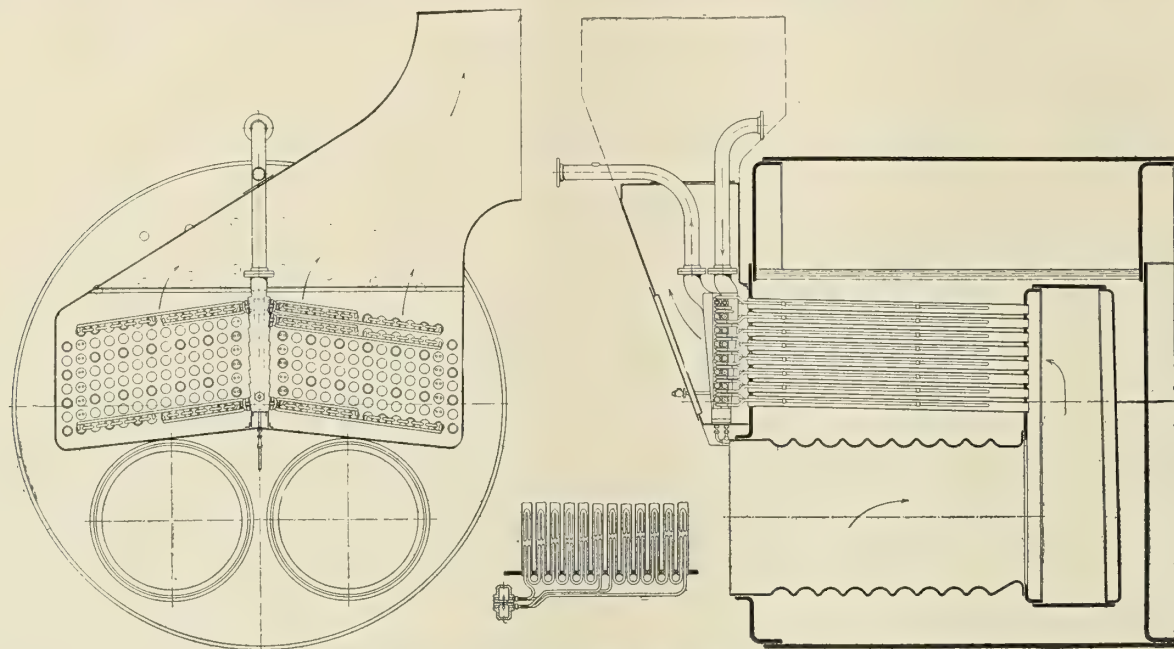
SCHMIDT SMOKE TUBE SUPERHEATER.
